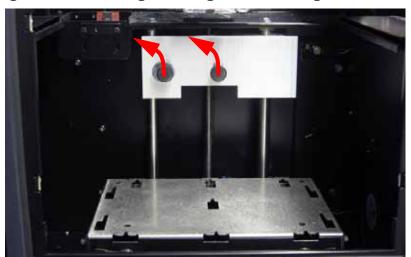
Inserting the Z stage leadscrew alignment fixture
